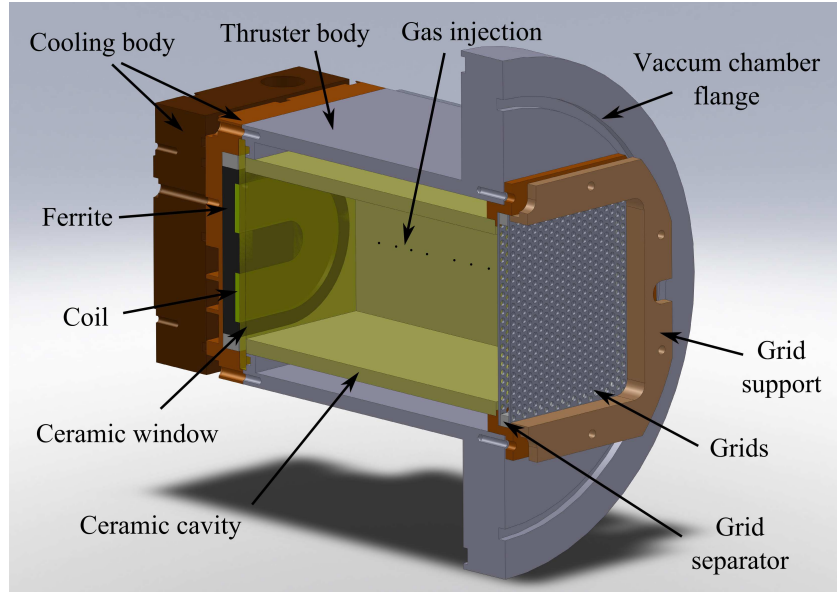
The second PEGASES thruster prototype as an assembly drawing made in a CAD system.
